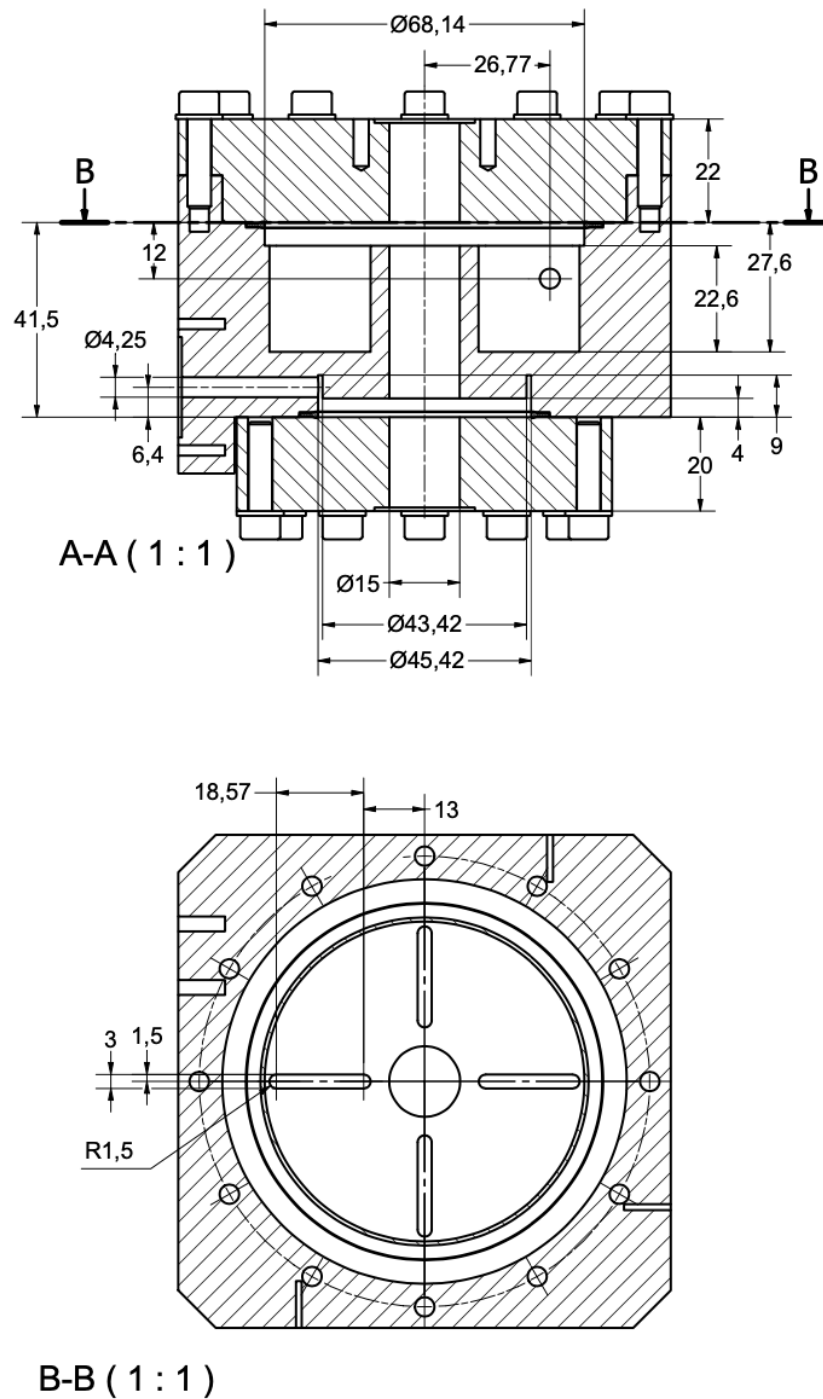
Mechanical drawing of the 5.1 GHz prototype. Dimensions are in mm.
